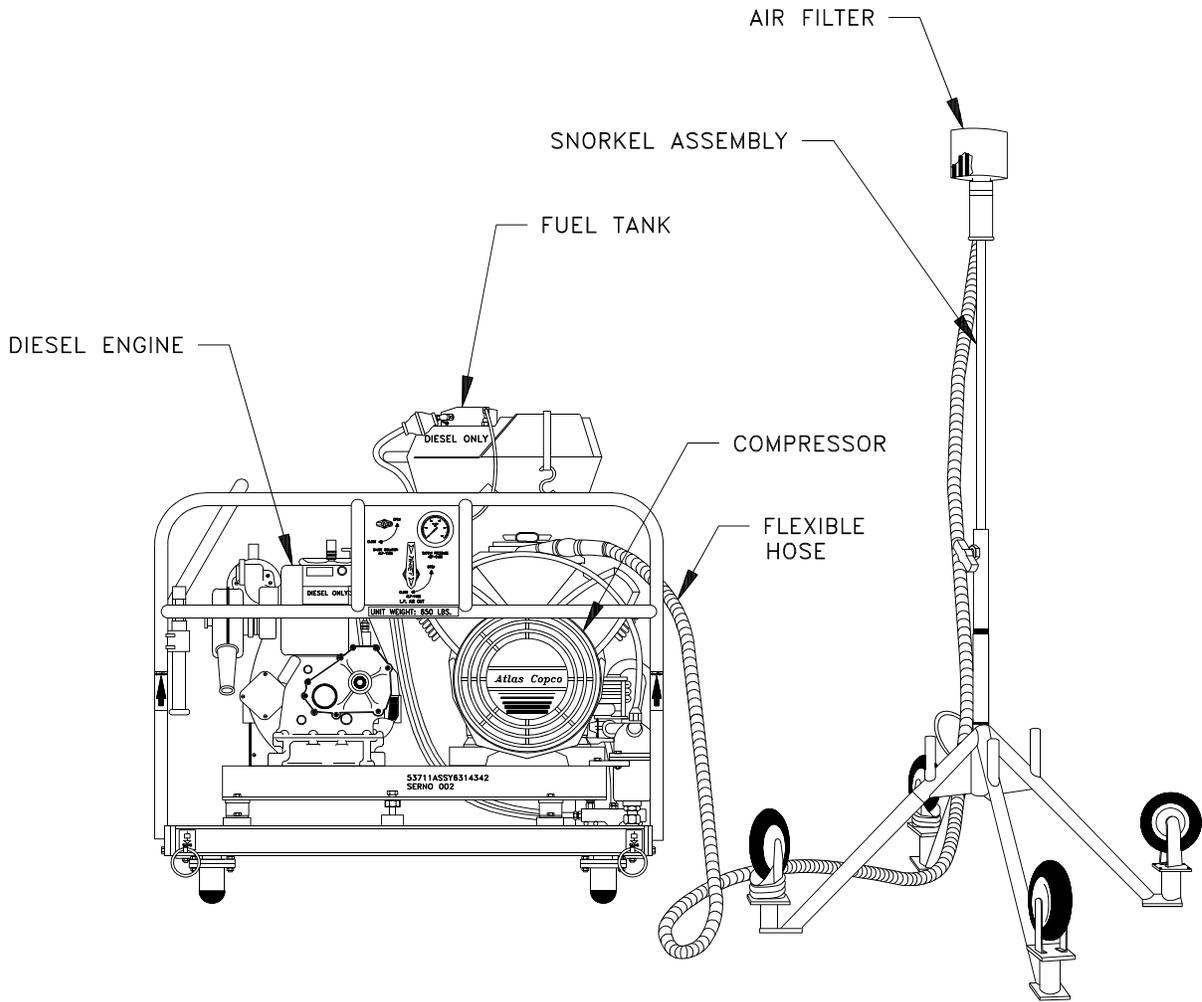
Diesel-Compressor Assembly with Snorkel Assembly
